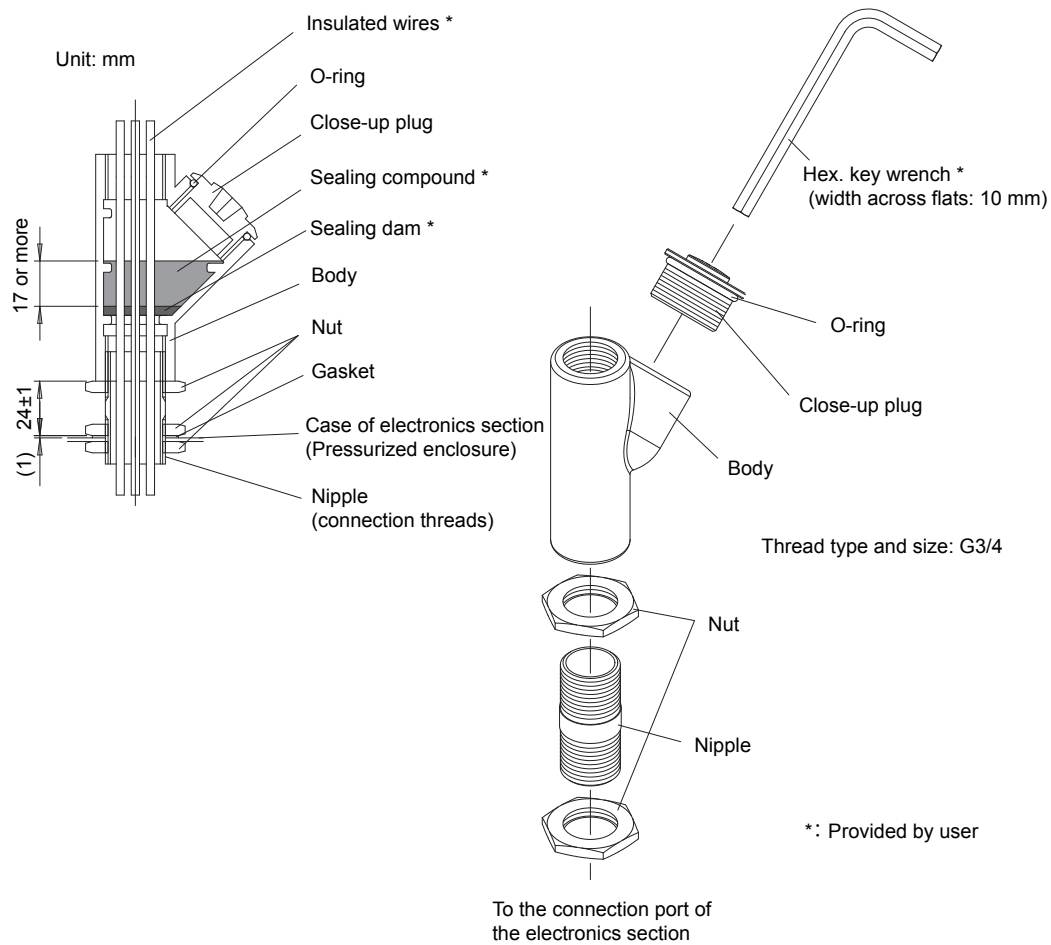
Mounting procedure for sealing fitting (accessory)
